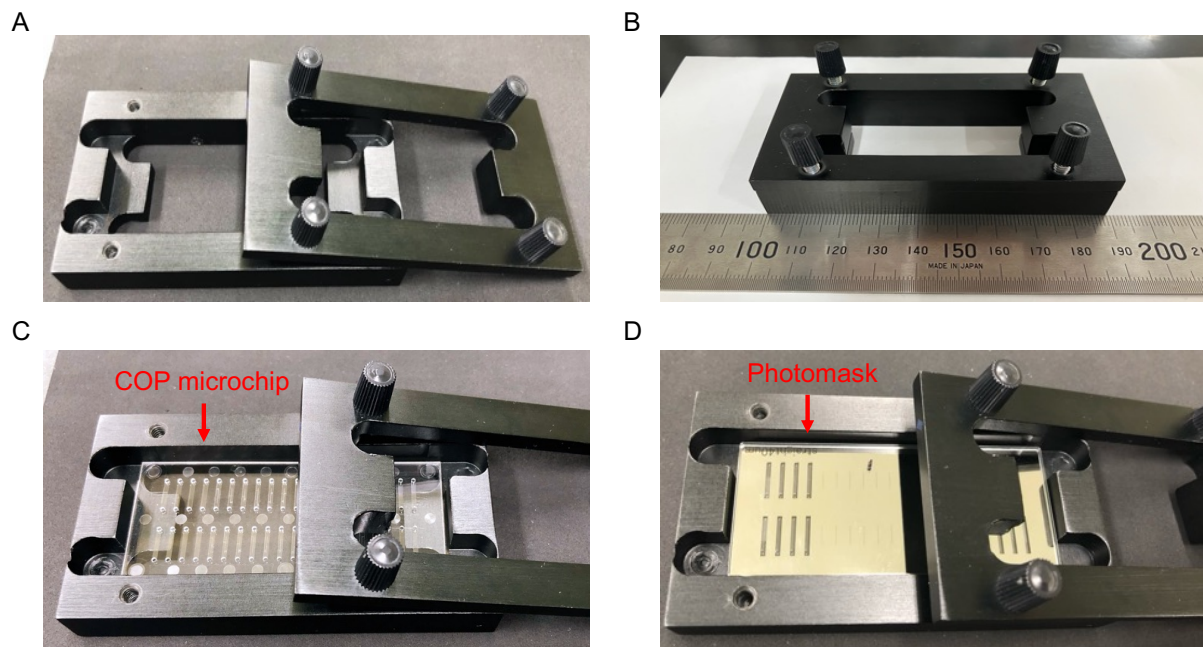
(A) Photograph of alignment holder. (B) Alignment holder with a scale (smallest division: 1 mm). (C) COP chip inside alignment holder. (D) COP chip with aligned photomask inside alignment holder.
